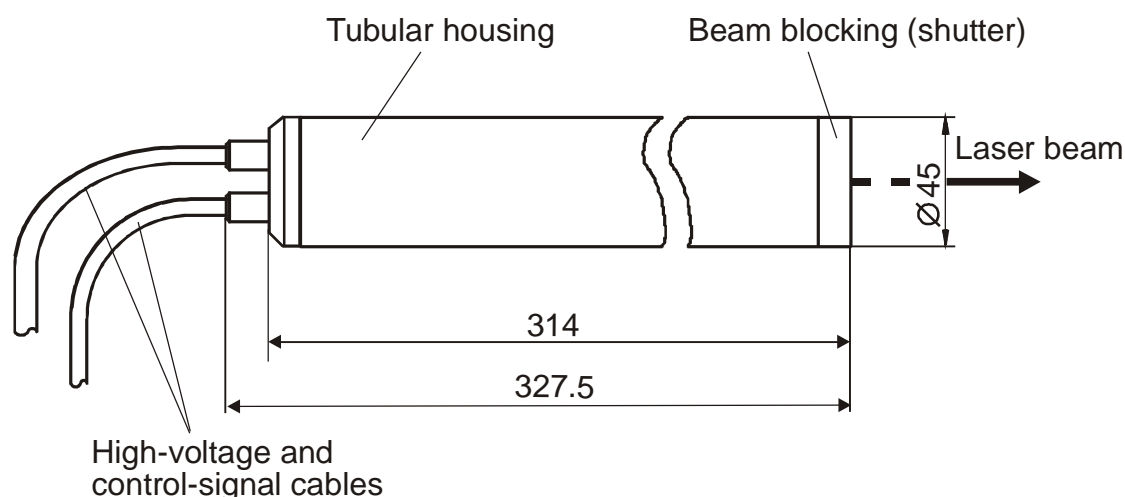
Laser-head dimensions and the locations of the connectors and beam-blocking shutter mounted on the laser head.
